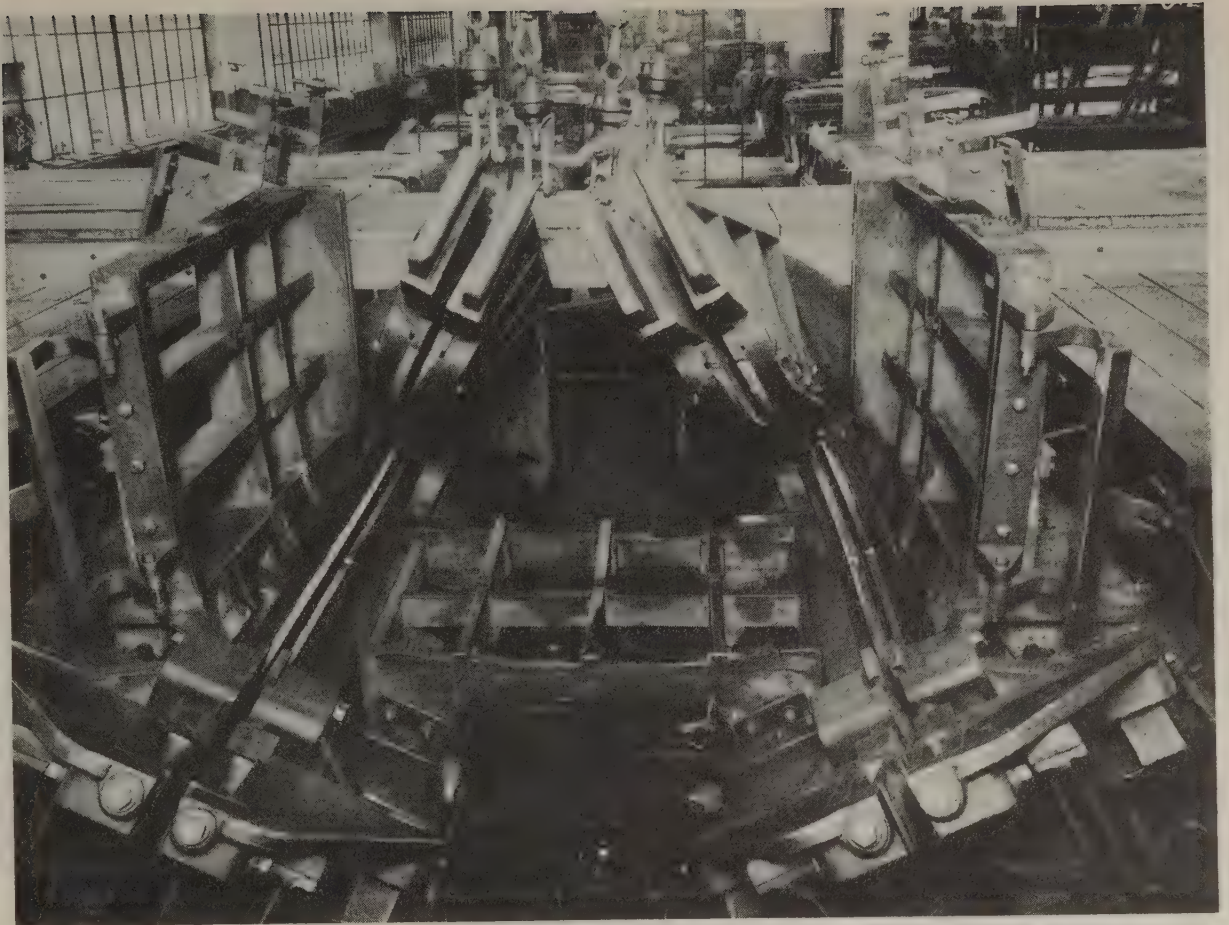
(at Left)—Oblique Welder. When current comes in through upper electrode it makes a spot weld on flange and flows out through terminal clamped to inner frame. Lower die is insulated and carries away no current
